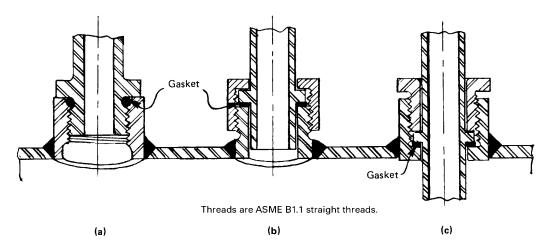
TYPICAL THREADED JOINTS USING STRAIGHT THREADS
